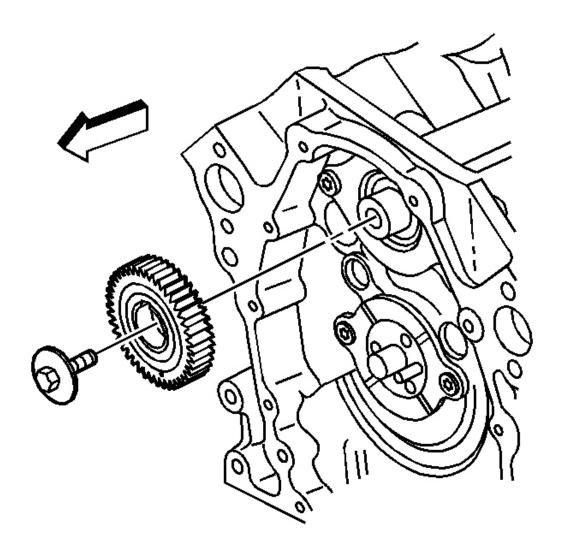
Locating Balance Shaft Driven Gear Courtesy of GENERAL MOTORS CORP.
